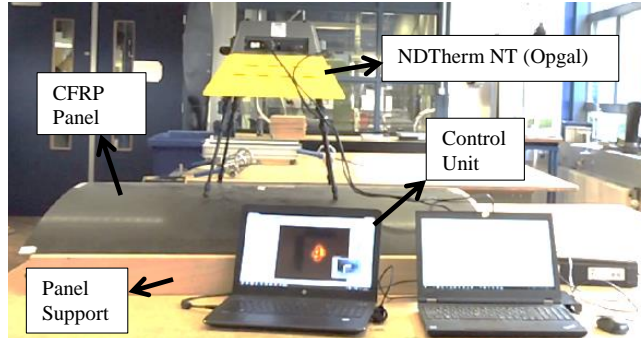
CFRP panel inspection using the NDTherm NT (OPGAL).
